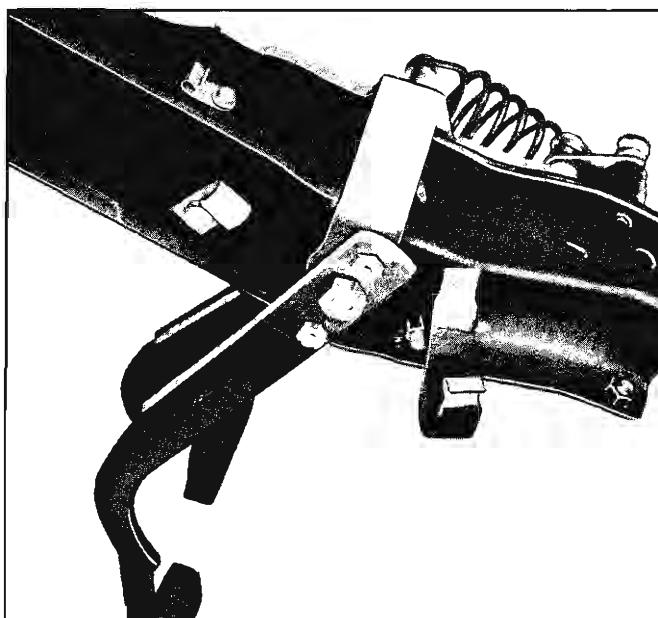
D-7 4-cyl & V-8 Standard Upper Clutch Linkage
